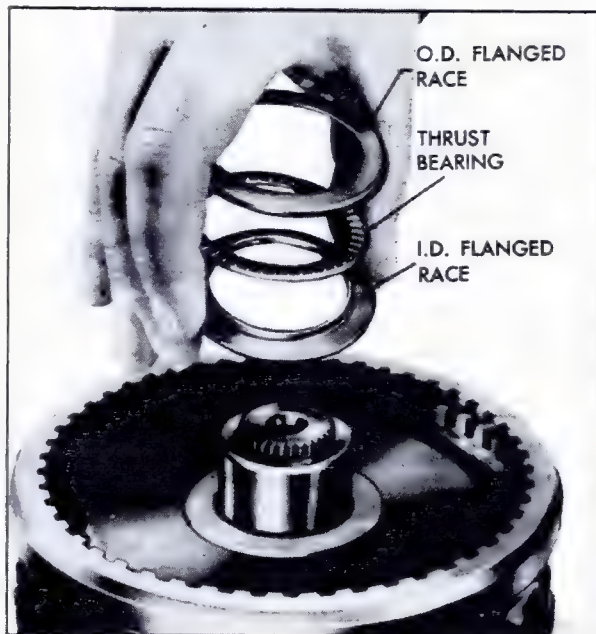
Installing Races and Thrust Bearing on Outer Face of Rear Internal Gear
